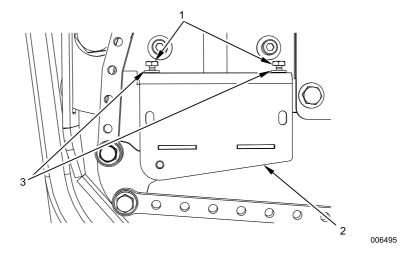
Hex Bolts Installed on Inner Shaft Lockplate Bracket.
